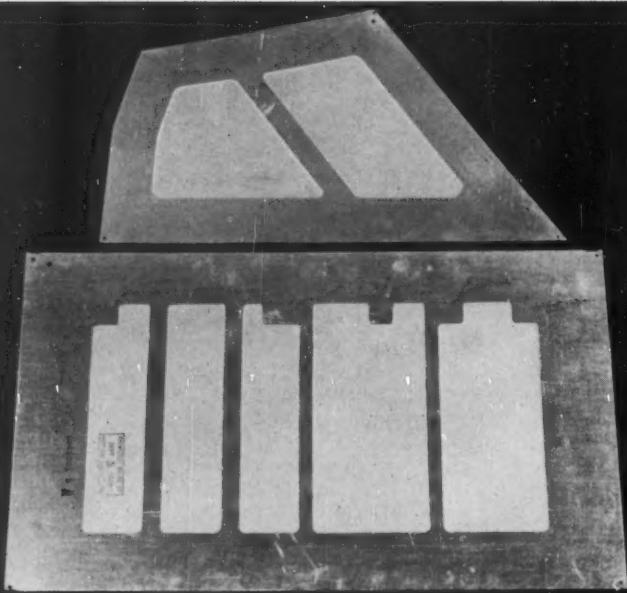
Above—Access doors are contoured slightly before chemical milling. Process is applied to advantage on such parts, since remaining web thickness is insufficient for practical machining. Parts can be chemically milled in large batches economically.
